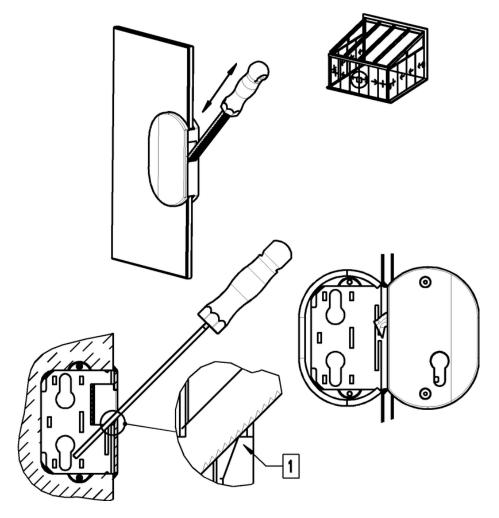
Adjusting the lockcase with hung bolt plus the latch bolt on lockplate versions - filing point
